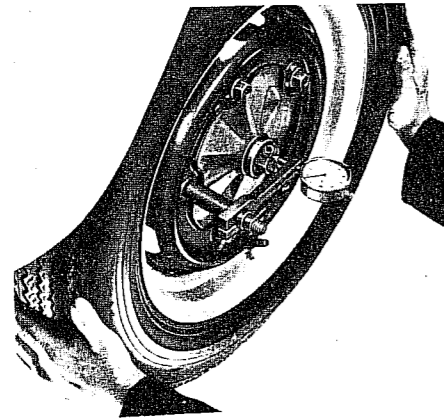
Checking the axial play at the front wheel bearing with a dial gauge.
